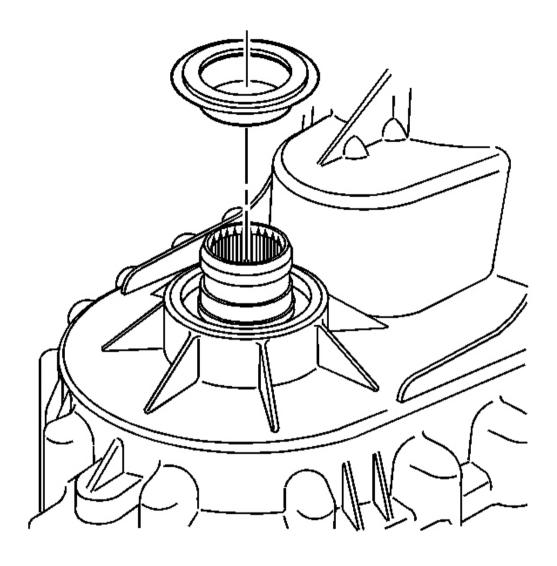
View Of Inner Seal Race From The Front Output Shaft Courtesy of GENERAL MOTORS CORP.
